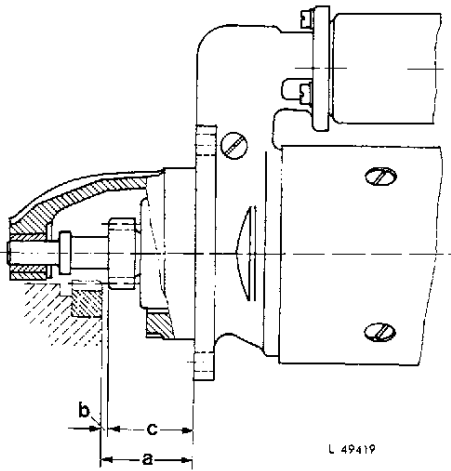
Ring Gear and Pinion Clearance, Pinion Protrusion
